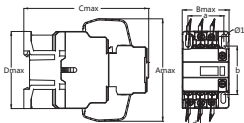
Overall and Installation Dimensions of NXCC-25 ~ 43 Contactor
